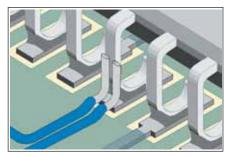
Not Recommended Multiple wires soldered to lead overhanging edge.
